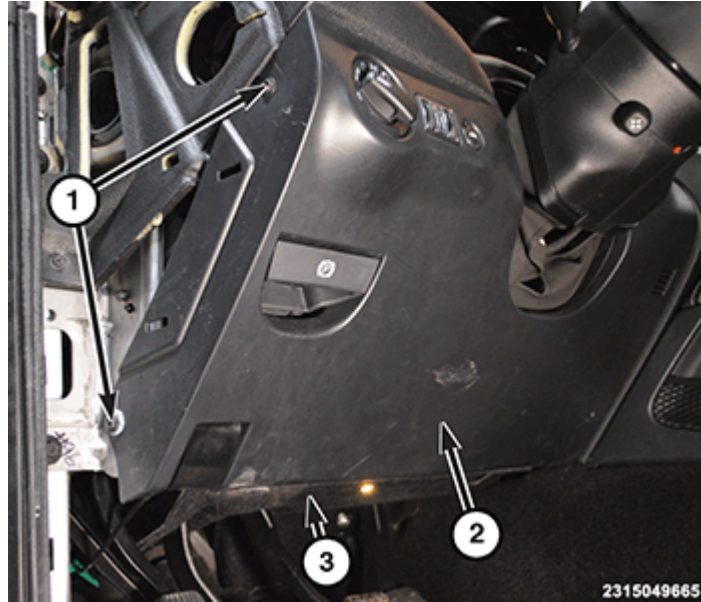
Screws, Steering Column Opening Cover & Instrument Panel Closeout
